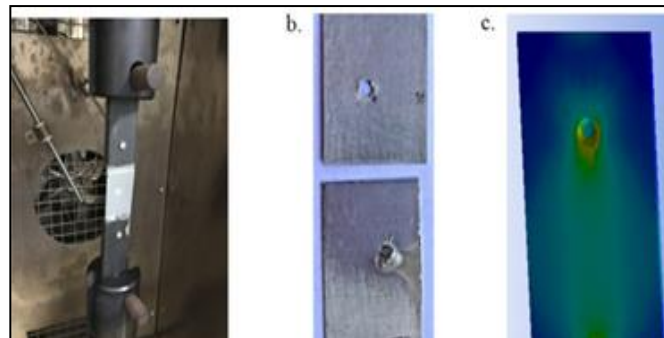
(a) Tension shear experimental setup (b) Test sample after failure (c) FEM (Ansys) failure weld
